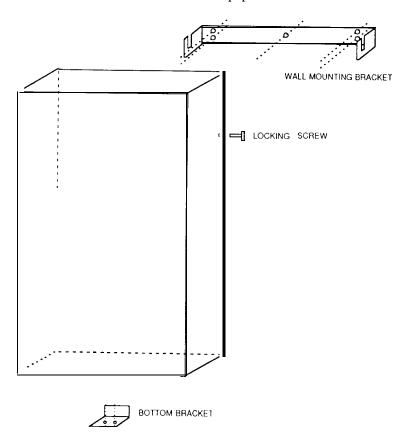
WALL MOUNTING OF MAIN EQUIPMENT CABINET
